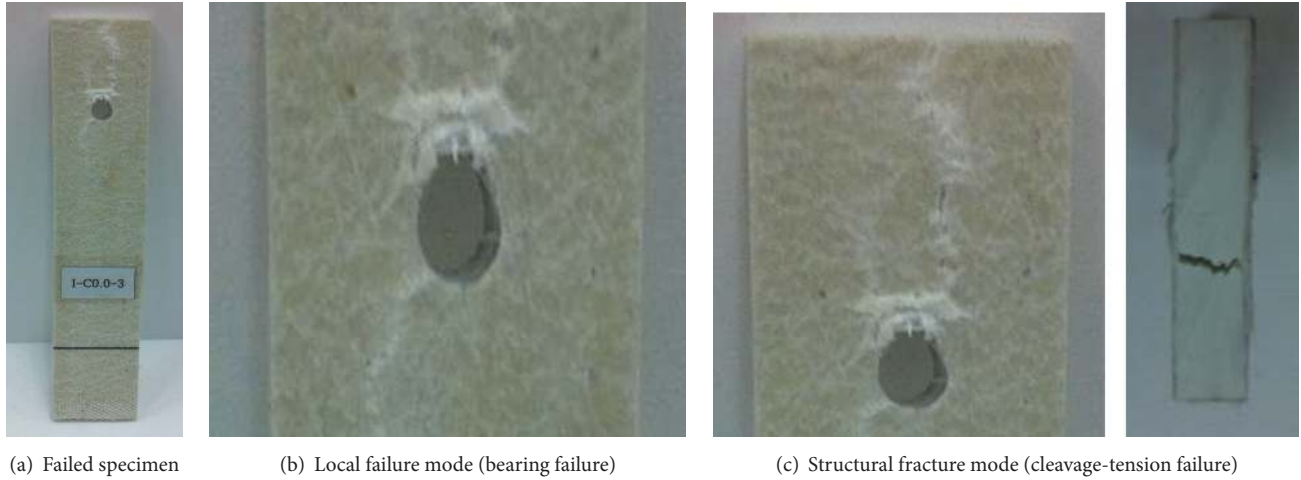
Examples of local failure and structural fracture modes (I-C0.0 specimen).
